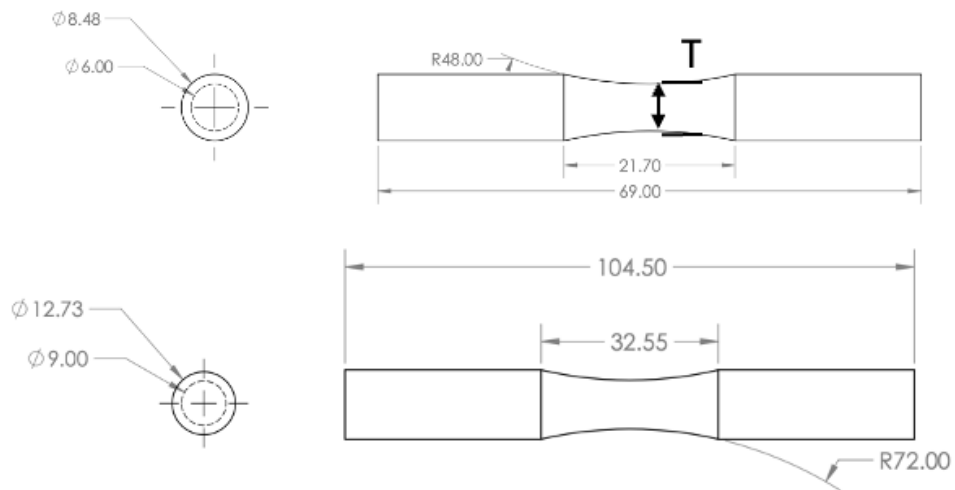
The final dimensions for the 6- and 9-mm samples post-machining per ASTM E466. Dimensions are in mm.
